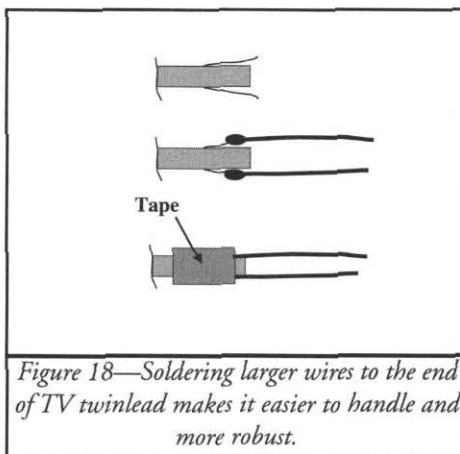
Soldering larger wires to the end of TV twinlead makes it easier to handle and more robust.
